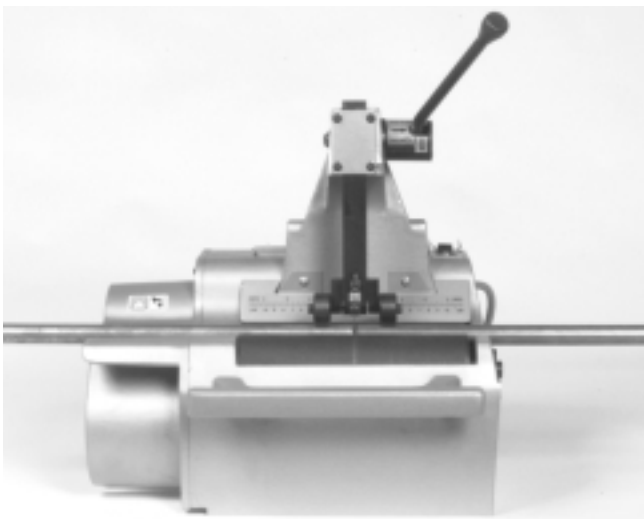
Cutter Wheel Support Rollers Holding Tubing After Cut
